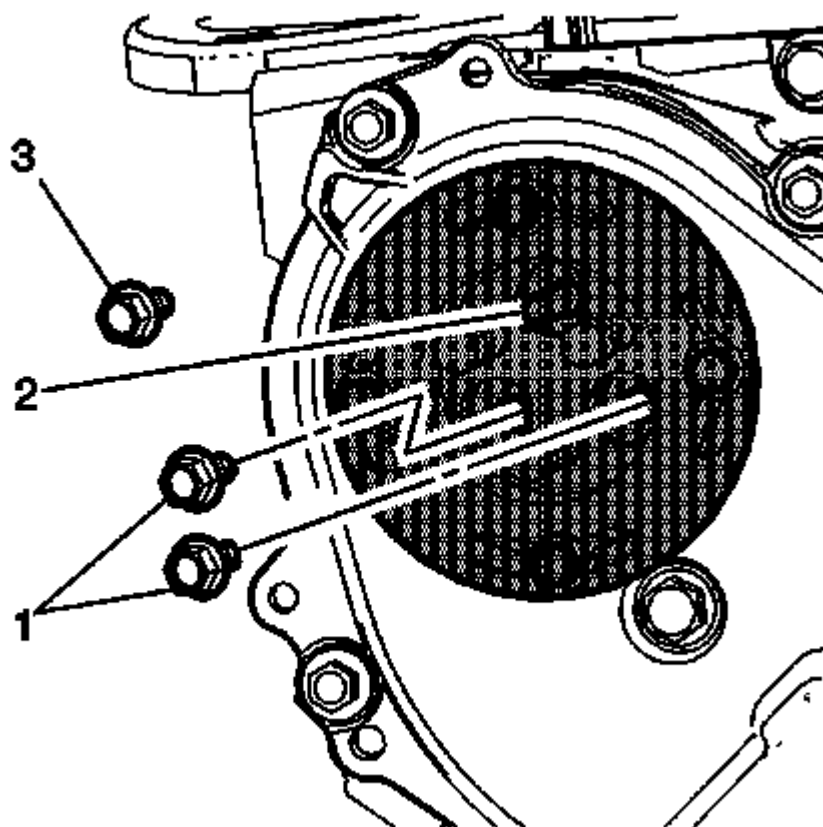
Water Pump Sprocket To Water Pump Fasteners And Guide Pin
